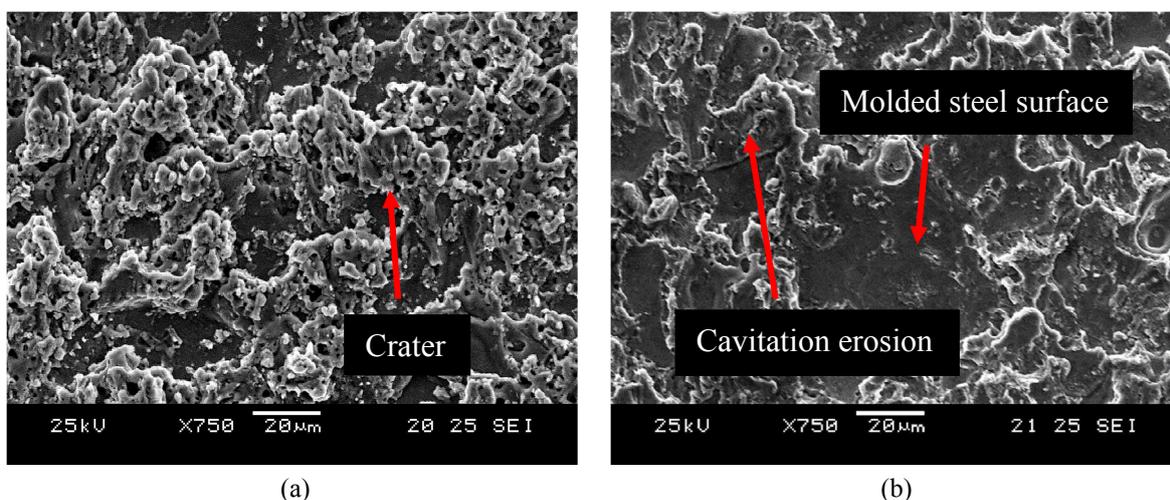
(a) EDM cut surface of SAE 304 stainless steel (b) surface after USM at T=50°C
